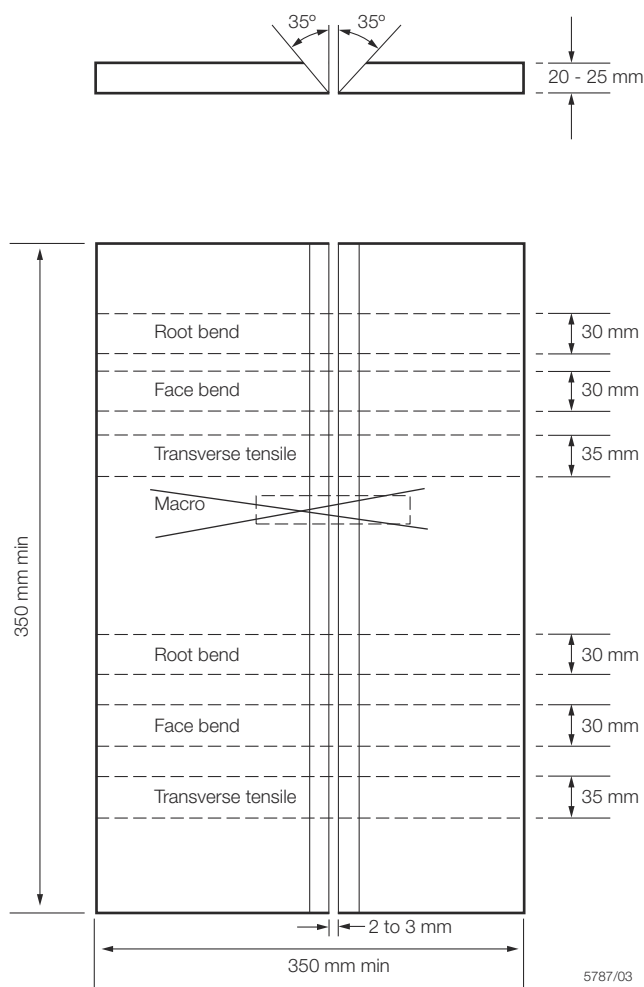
Butt weld test assembly (downhand, multi-run technique)
